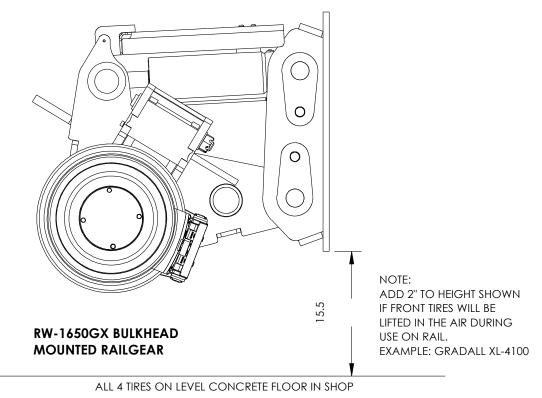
B RW-1650GX Bulkhead Gear Starting Height Location
